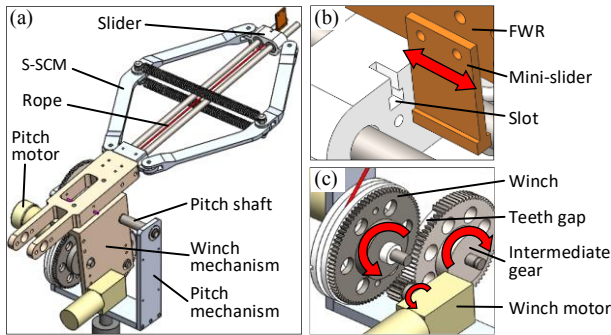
CAD model of the ejecting mechanism. (a) General view. (b) Detailed view of the slider. (c) Detailed view of the winch mechanism.
